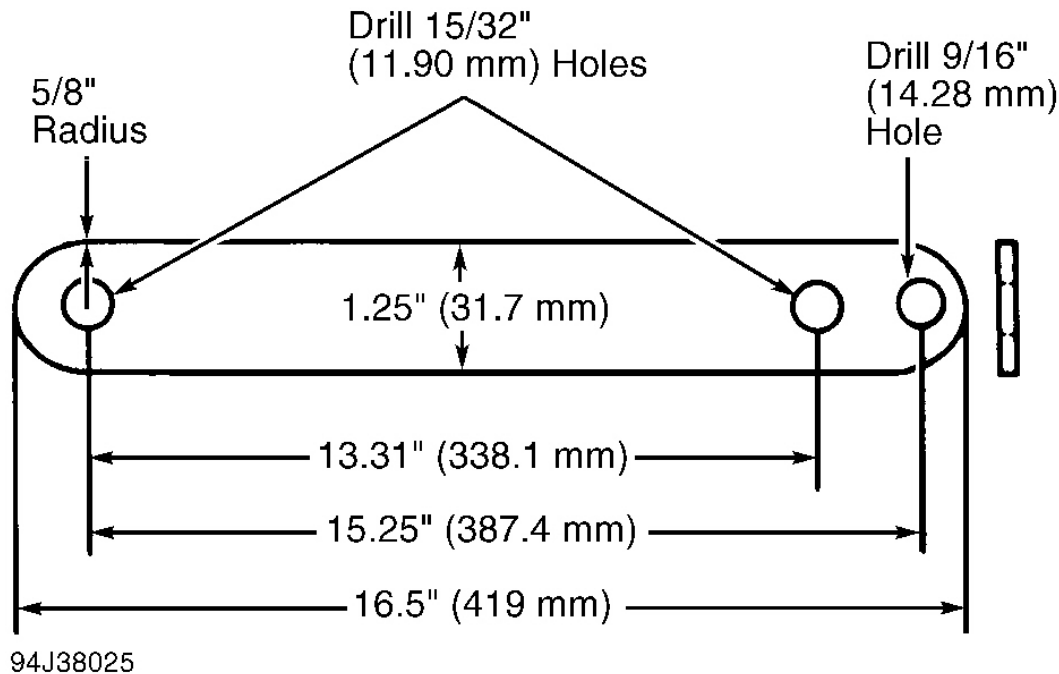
Fabricating Torque Converter Hub Seal Cup Retaining Strap
